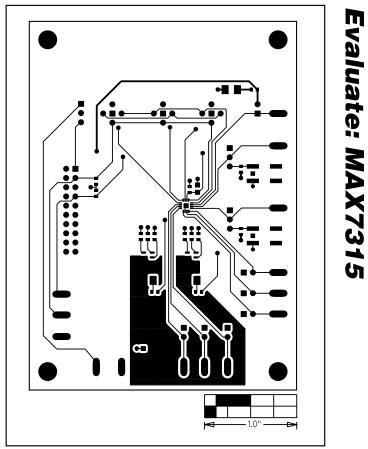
MAX7315 EV Kit PCB Layout—Component Side
